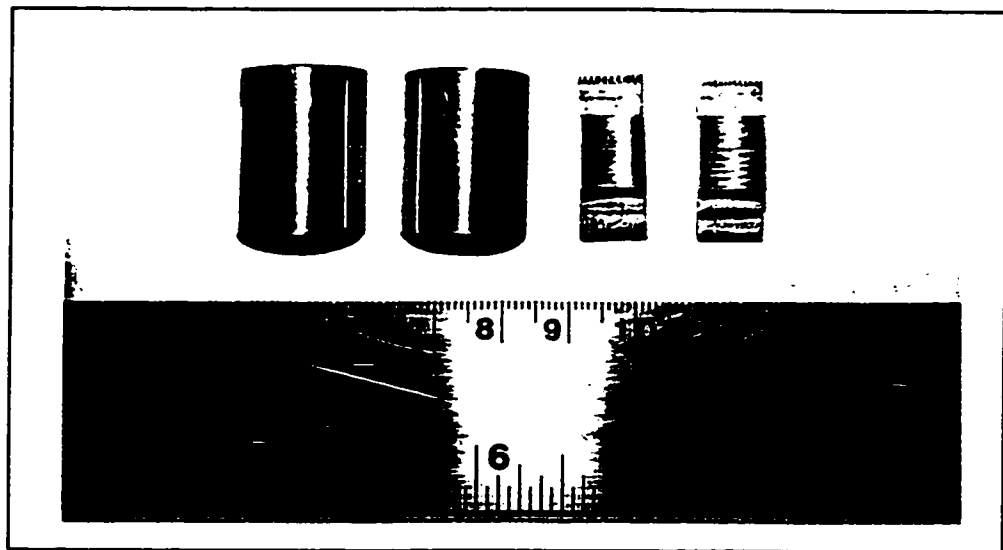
Tube and tubesheet frictional test specimens (Full area of contact)
